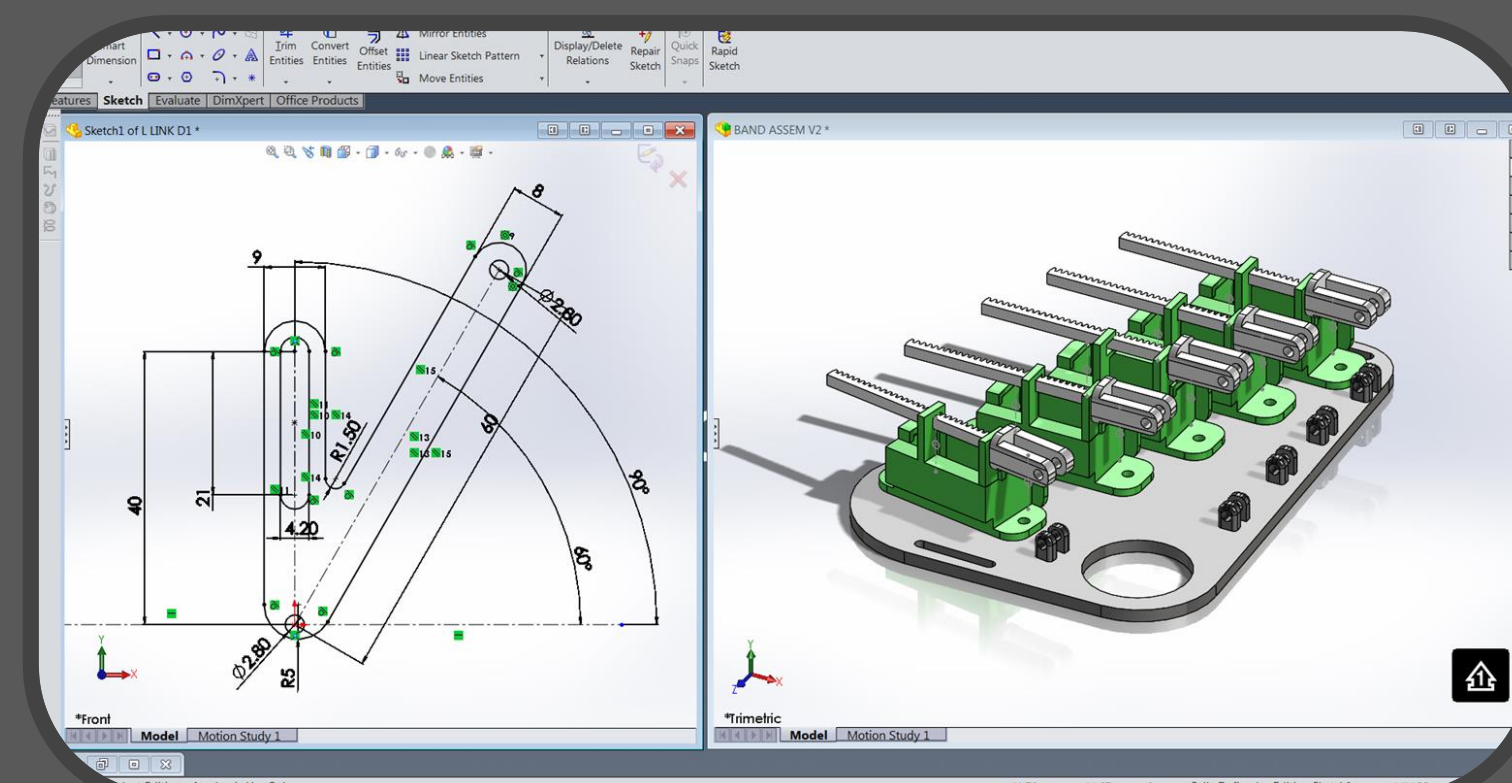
A SolidWorks sketch of an L-shaped link (left). A SolidWorks assembly of the band components (right).
